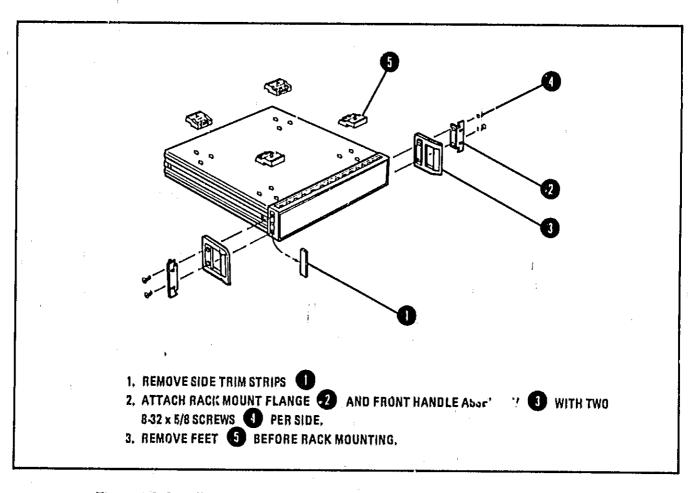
Installation of Rack-Mounting Hardware with Front Handles Supplied
